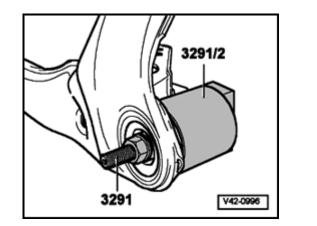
Pulling out rear bonded rubber bushing from subframe
